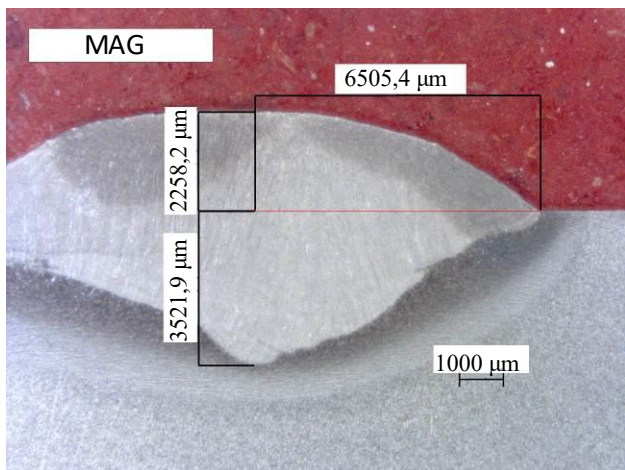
Weld cord without addition of cold wire in the melt pool
